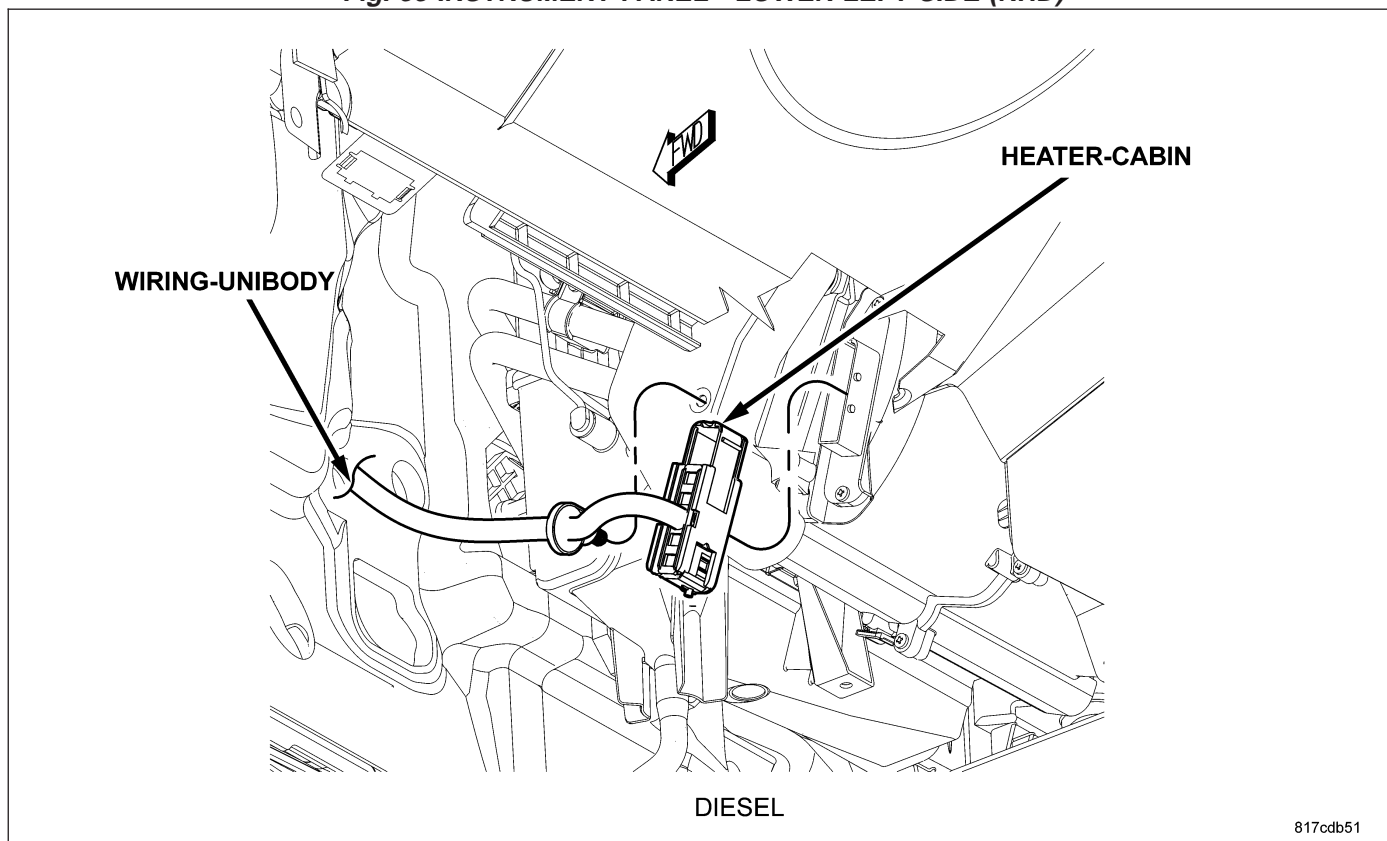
INSTRUMENT PANEL - LOWER CENTER (DIESEL)
